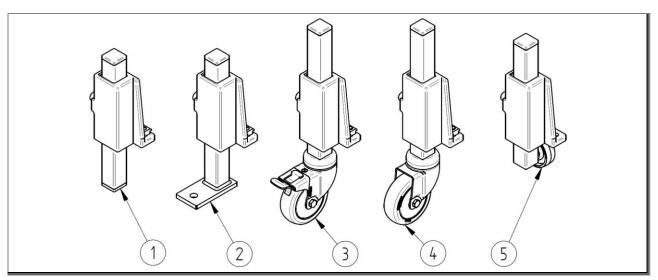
Conveyor support parts list, cons.-KIT ZZ.982.0105.00
